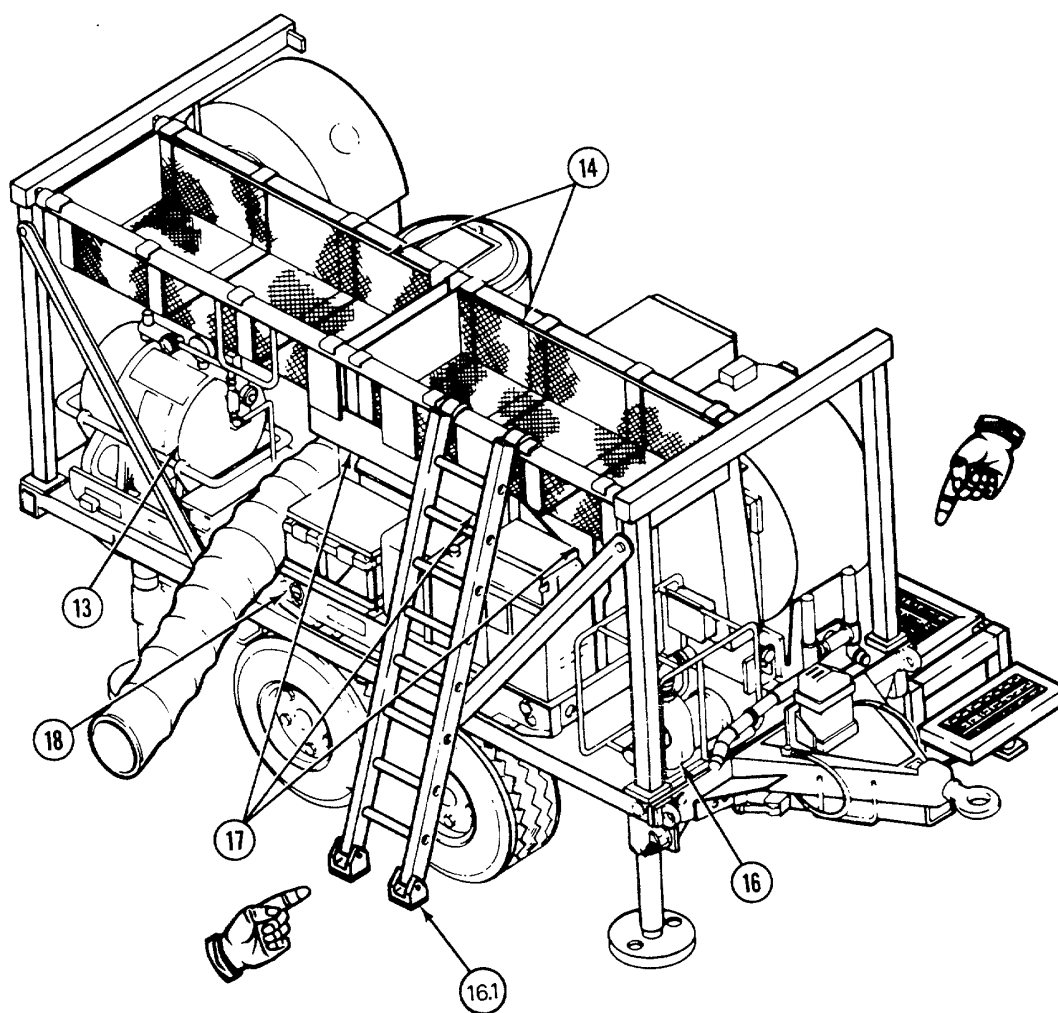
M85 Trailer Mounted Laundry Unit component location. (Sheet 2 of 2)
